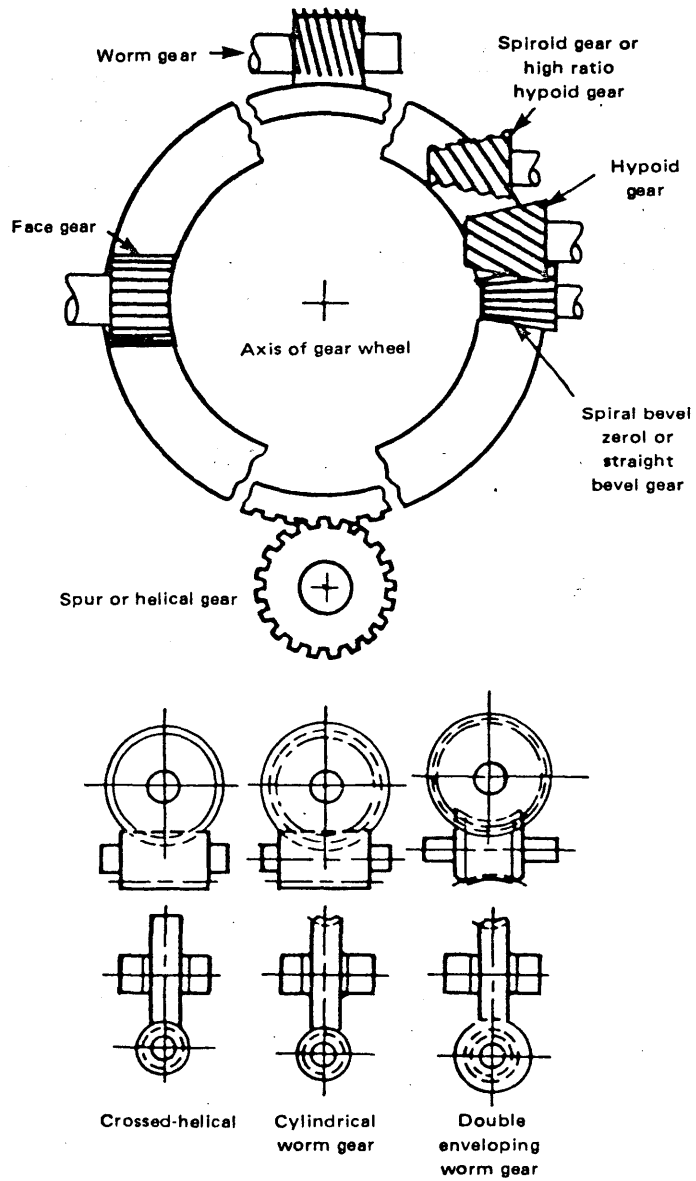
Types of Gears Commonly in Used in the Gear Trade (43)
